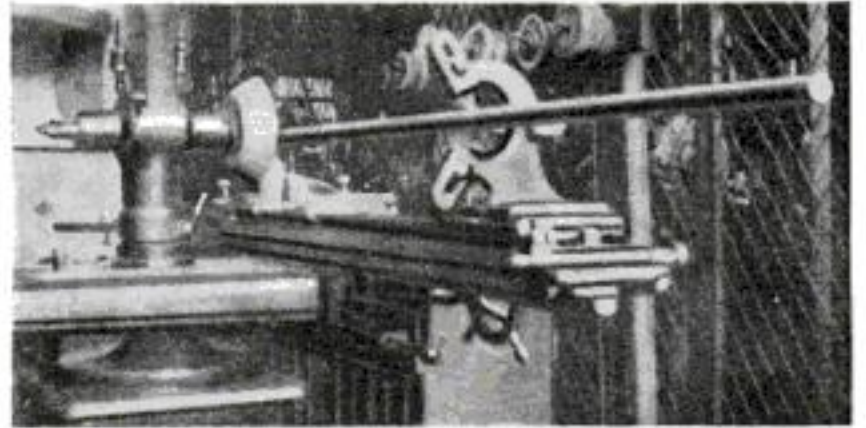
Grinding a 72-in. line reamer on an ordinary tool grinder. Reamers of this type are economical for use in jobbing shops.
